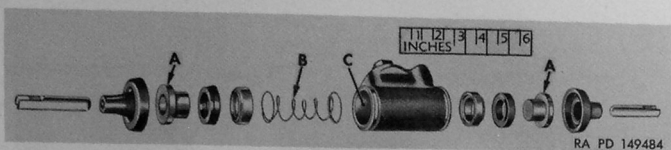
Repair and rebuild standard points of measurement for wheel cylinders.
